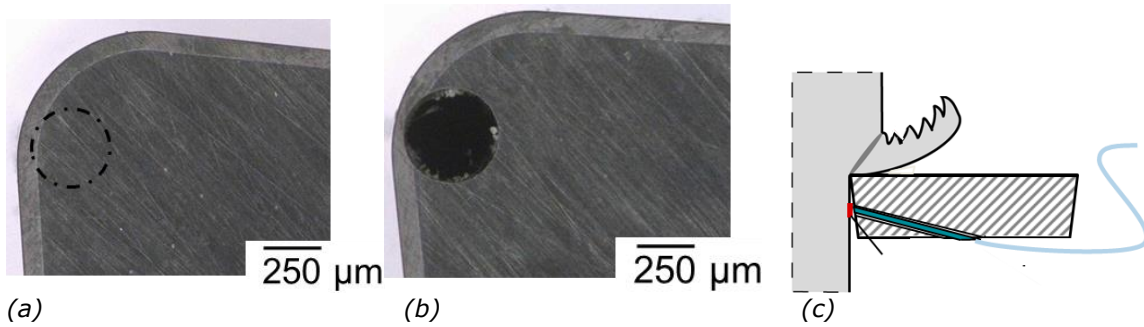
Fundamental investigations in tailored machining tests. The PCBN cutting tool rake face (a) as-received and (b) with EDM machined hole for optical fibre passage.
